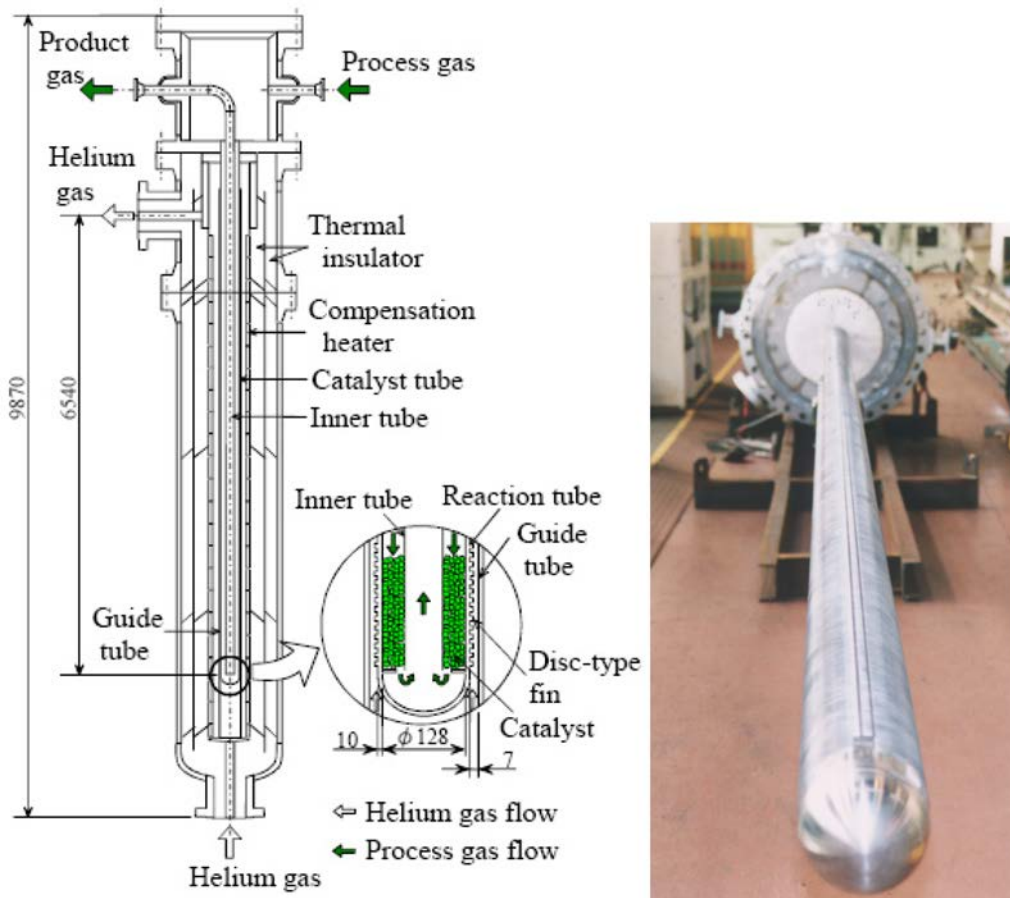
Bayonet type steam reformer tube used in the mock-up facility [210].
